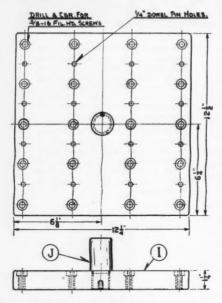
Punch holder for the die shoe illustrated in Fig. 1.
